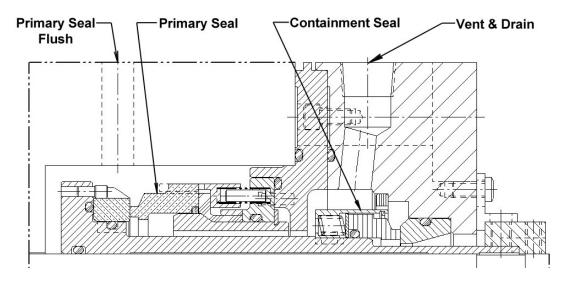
Typical single pipeline mechanical seal with secondary containment seal
